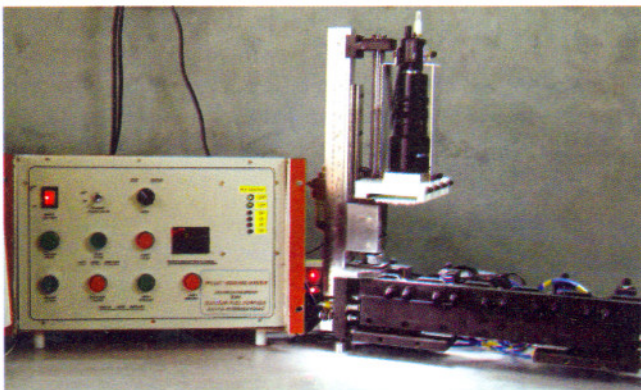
Photograph of the pellet inspection station.
